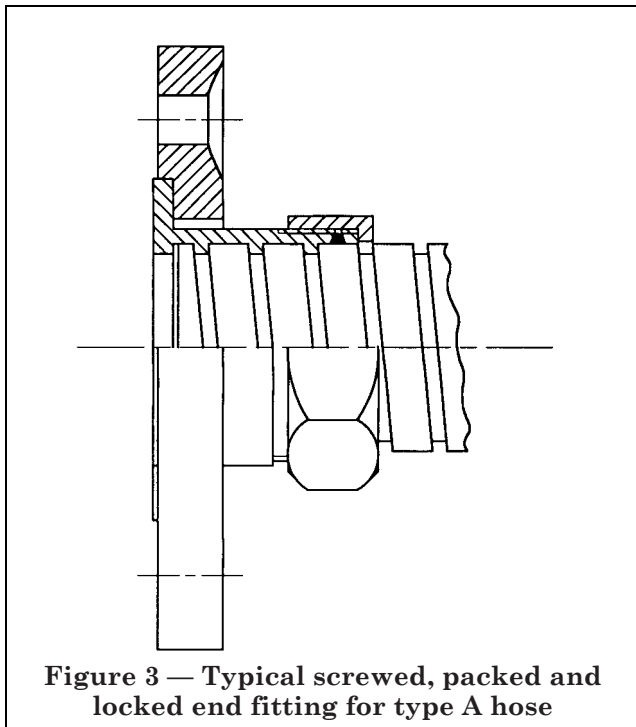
Typical screwed, packed and locked end fitting for type A hose
